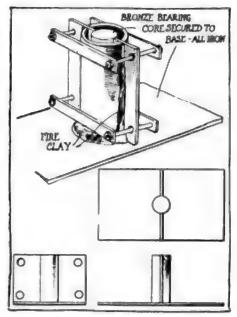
EQUIPMENT FOR RE-BABBITTING
